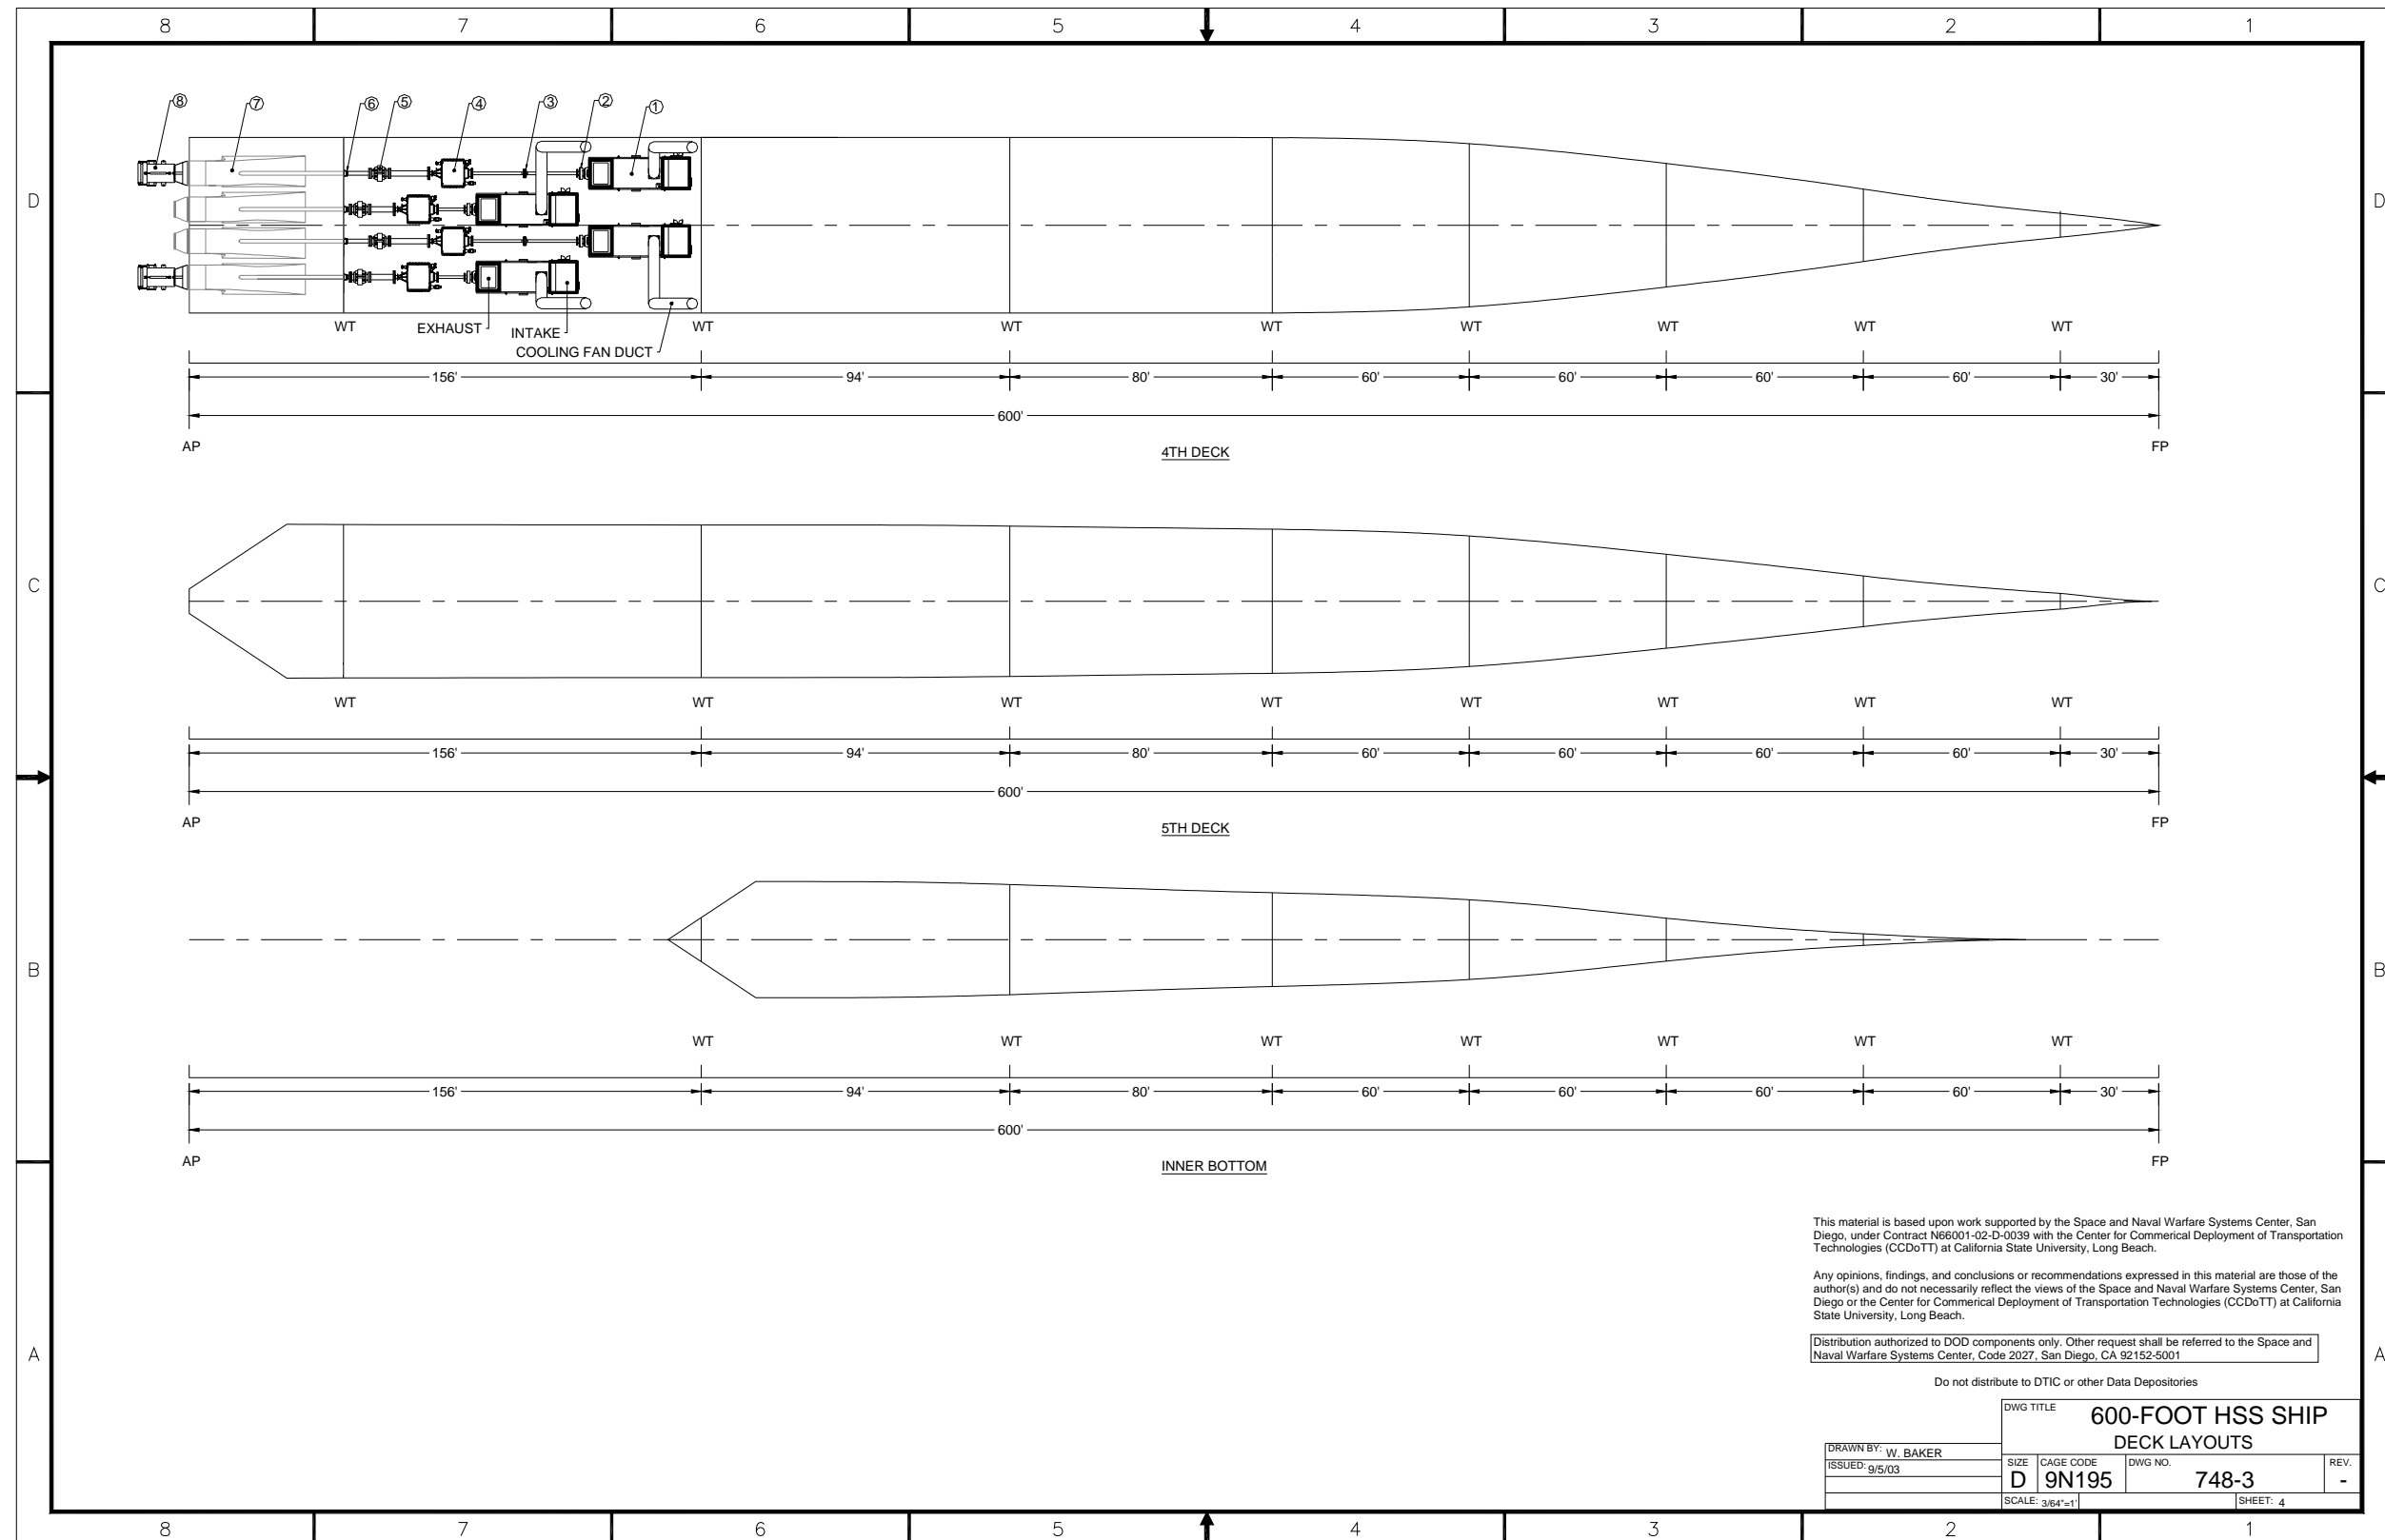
600-Foot High-Speed Sealift (HSS) Layouts
